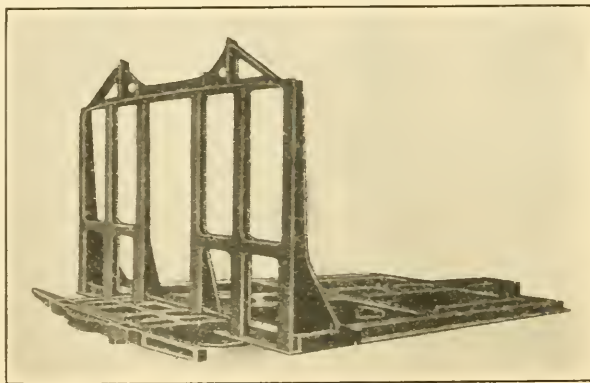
INTEGRAL STEEL CASTING USED IN END FRAME CONSTRUCTION
